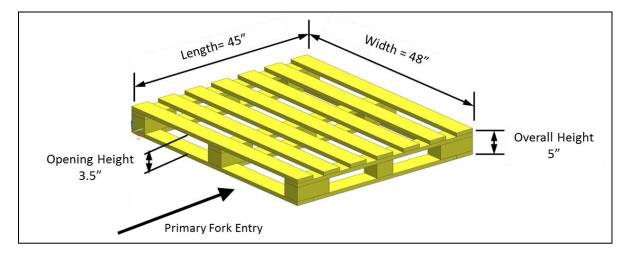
Example of a 9 Block Full Perimeter Pallet
